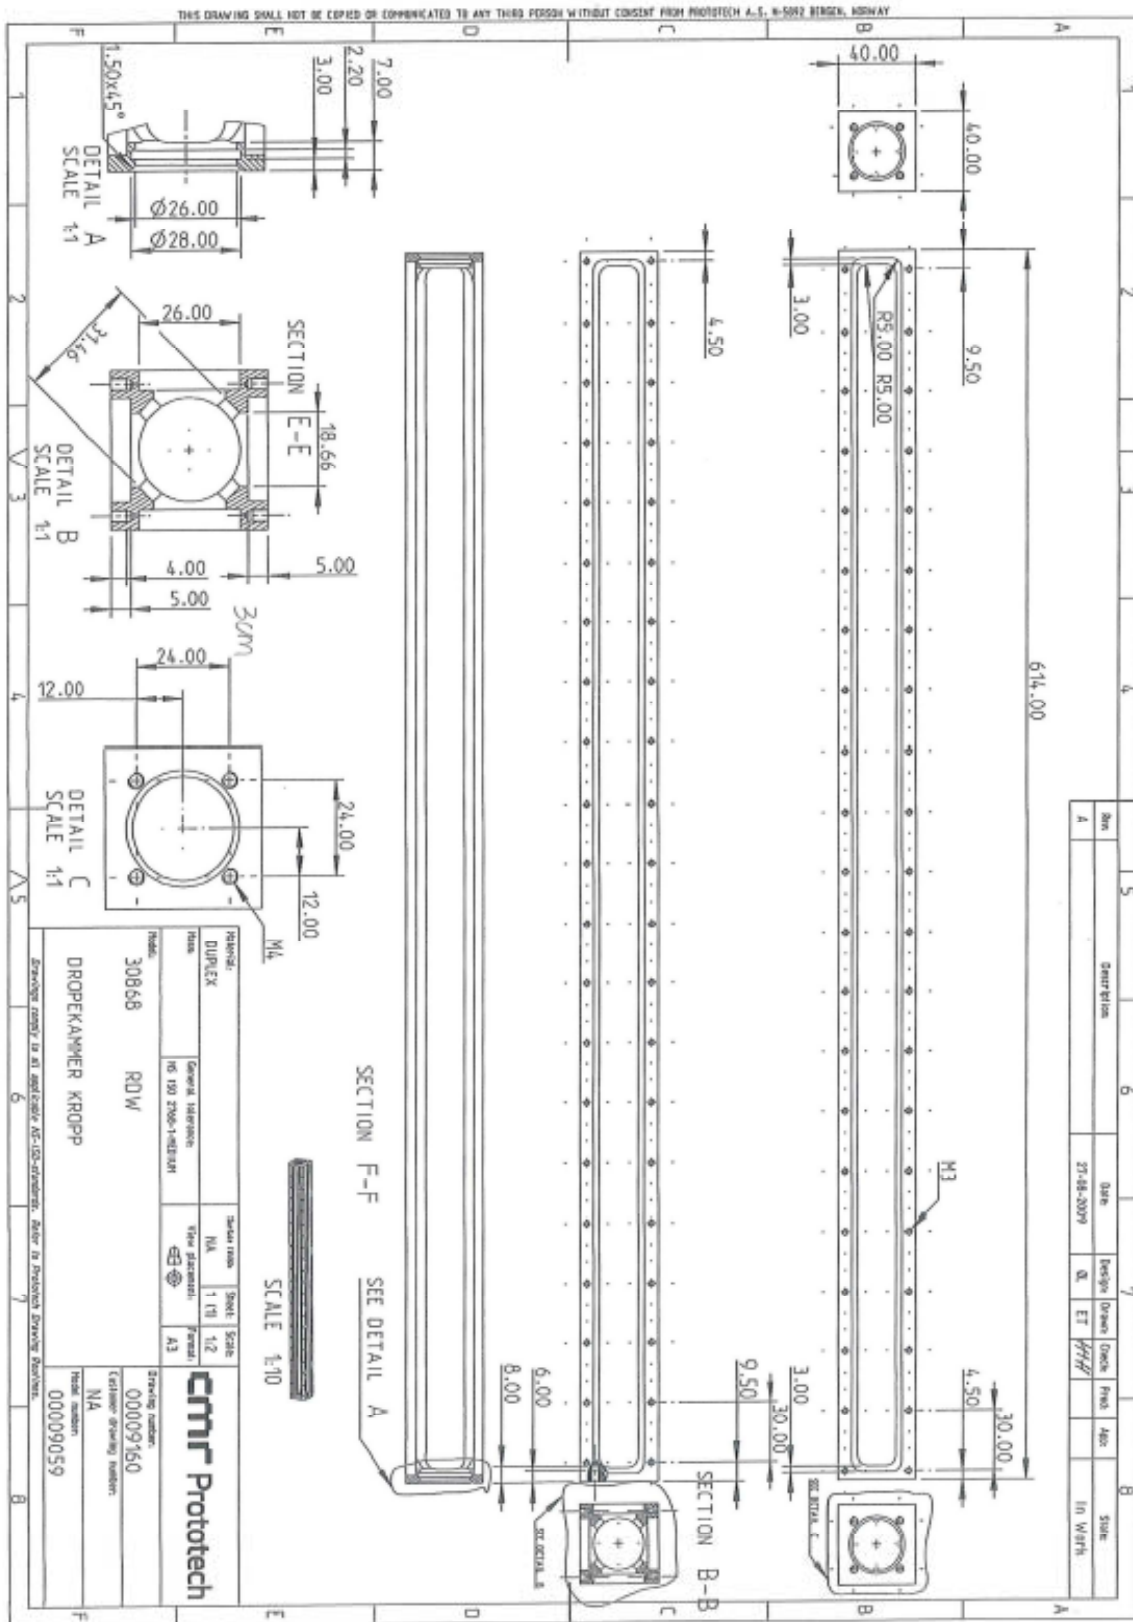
The design drawing of the gas chamber from CMR Prototech.
